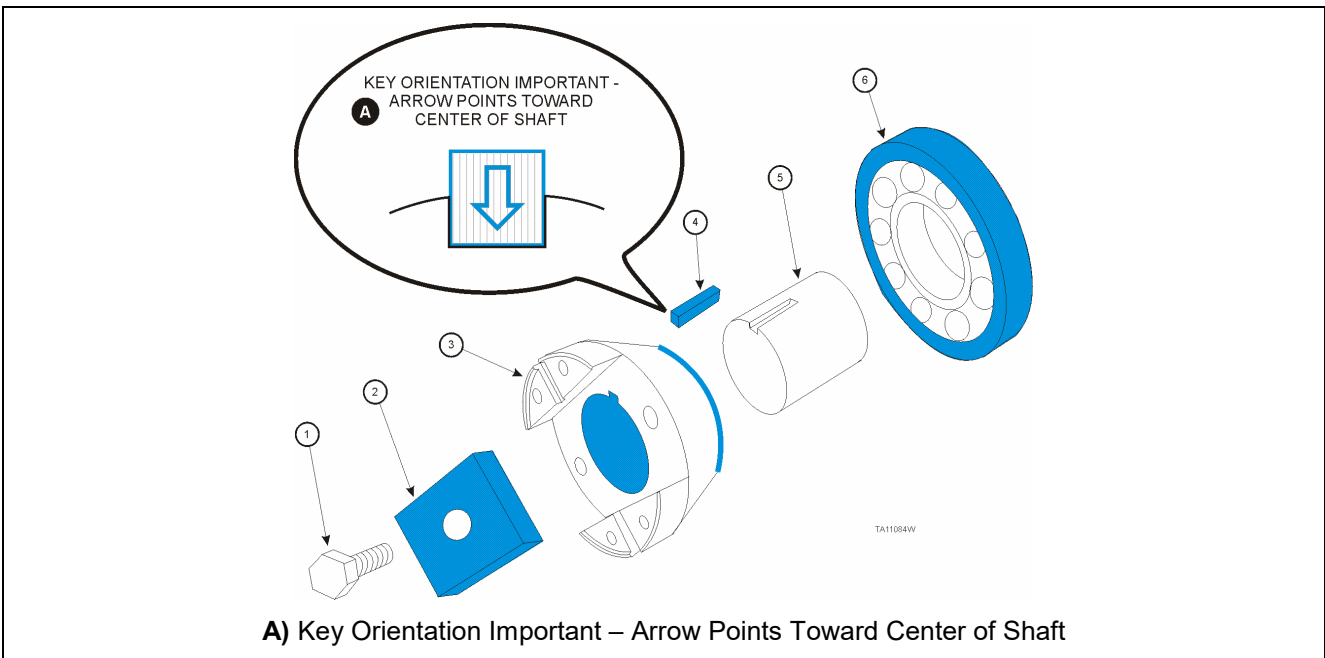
L1350/L1850/L2350 HPD gearbox drive shaft installation
